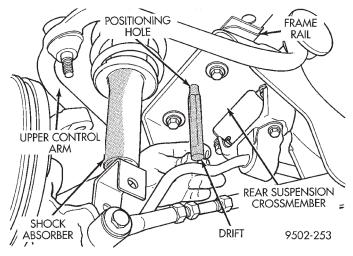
Locating Rear Suspension Crossmember In Vehicle
